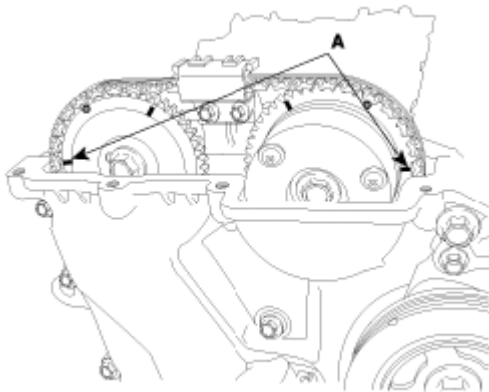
Identifying Mark Of Camshaft Timing Sprockets And Cylinder Head
